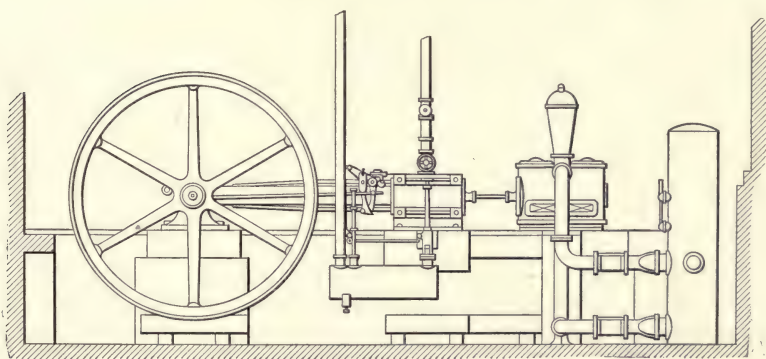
Horizontal Fly Wheel Pumping Engine.
